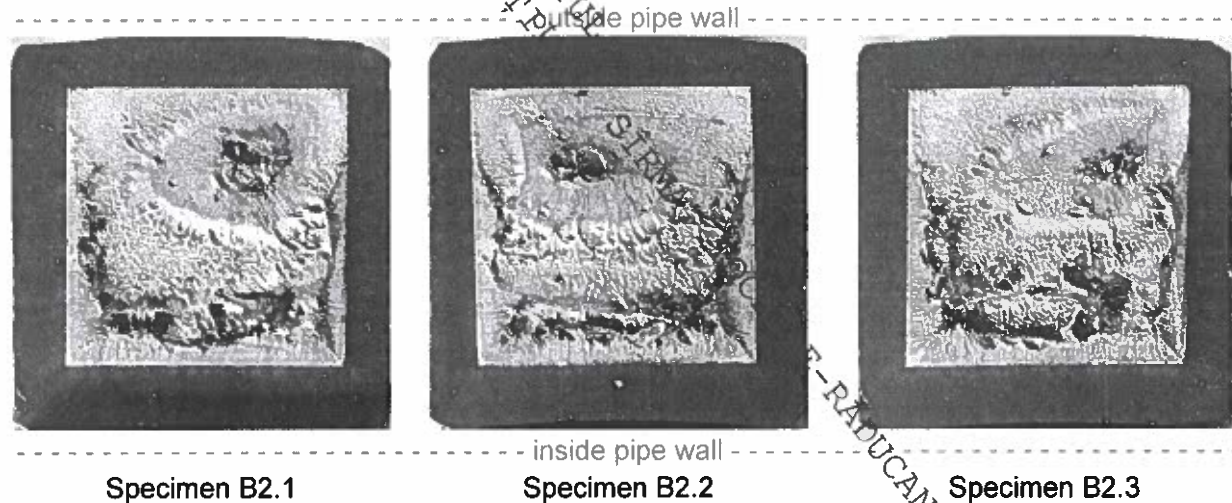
Top view of the fracture surfaces (one half of each specimen)
